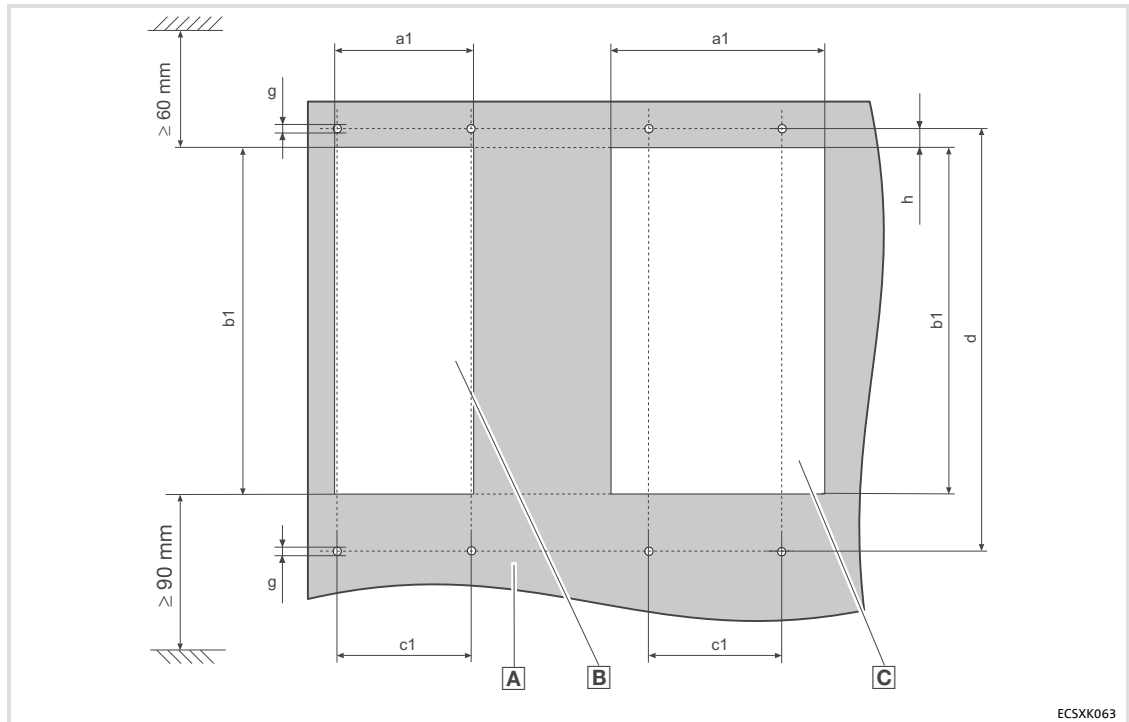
Dimensions of mounting cutout for thermally separated mounting, ECSDKxxx type
